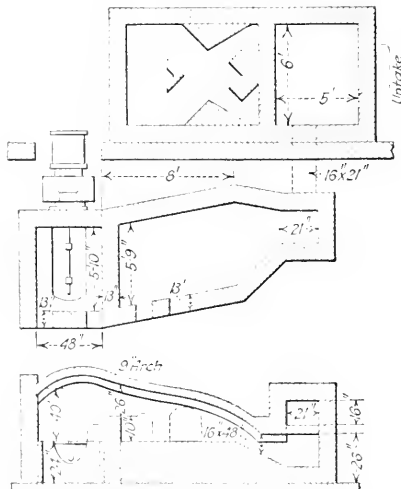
WASTE-HEAT RETURN-TUBULAR BOILER AND FORGING FURNACE WITH UNDERFEED STOKER
